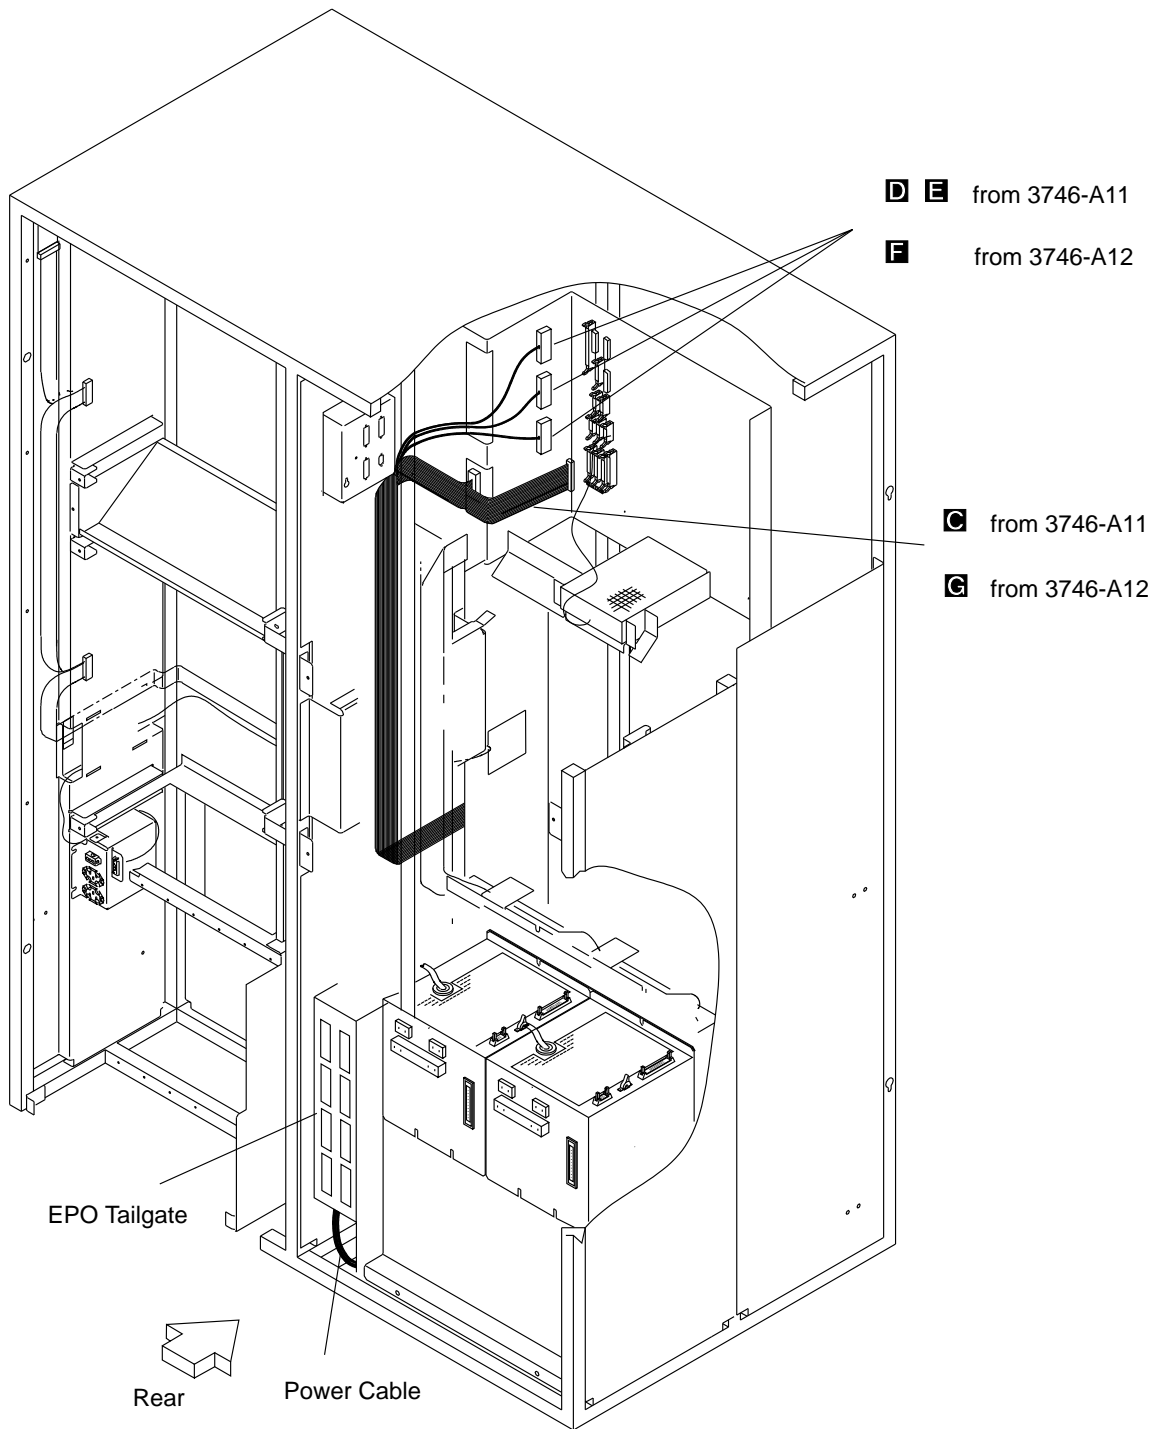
Cable Path from 3746-A Units to MOSS Board (3745 Rear View)
